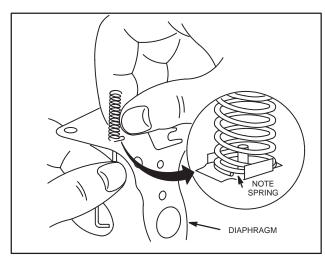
ASSEMBLE SPRING TO DIAPHRAGM
